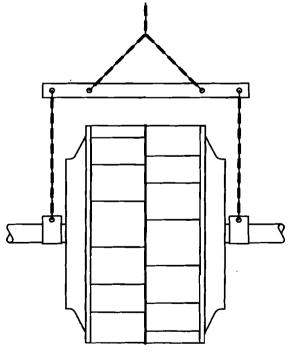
Correct use of spreader bar when lifting centrifugal rotor assembly.
